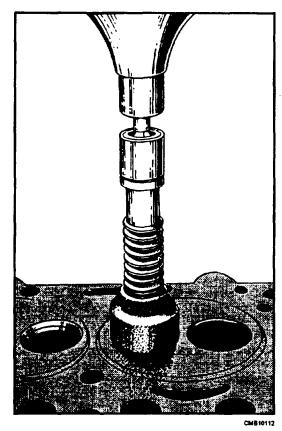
Grinding valve seats using a concentric type of grinder.
